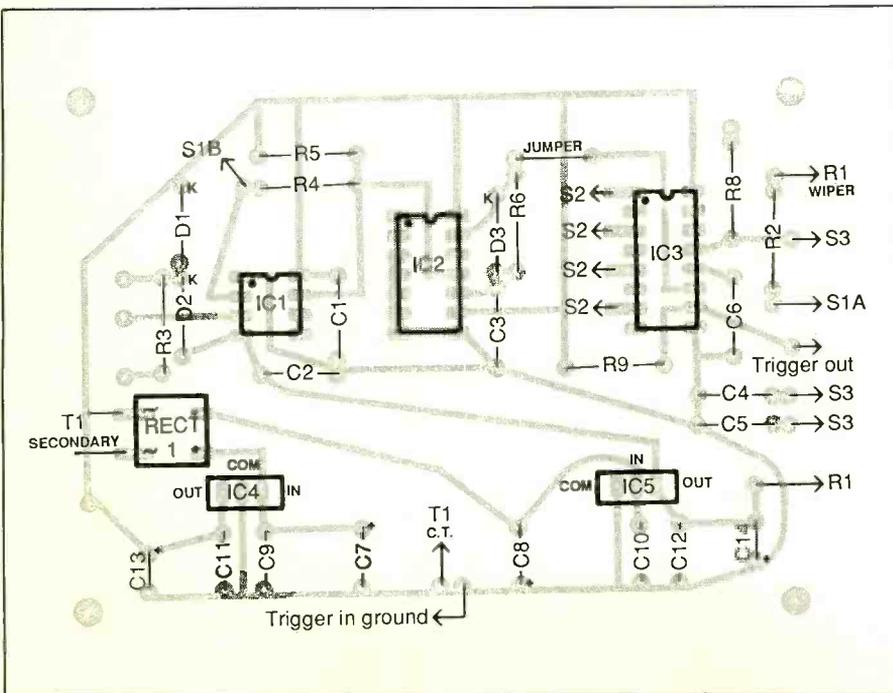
Wiring guide for pc board. Use this as component-placement guide if you wire circuit on perforated board.
